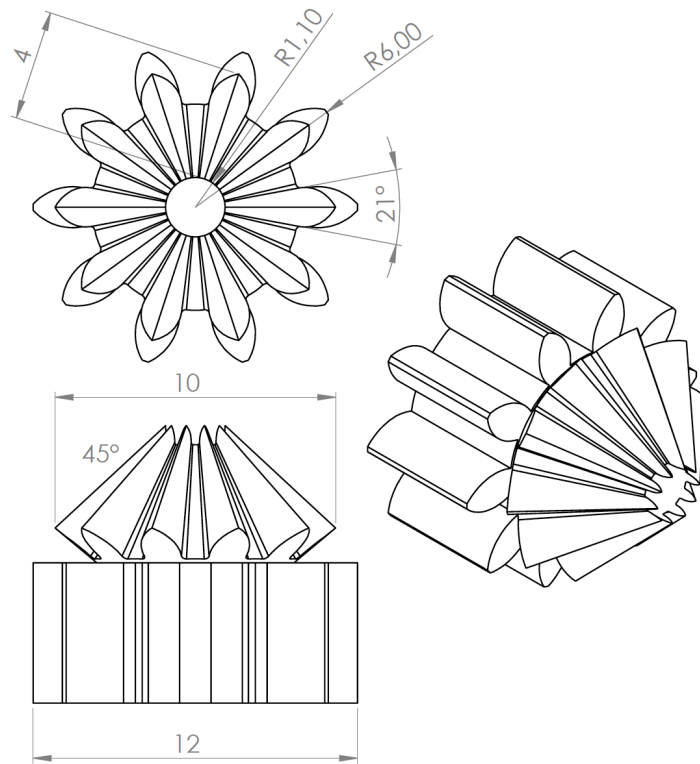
Selection of component views and dimensions (mm), C8 - Gears (1)
